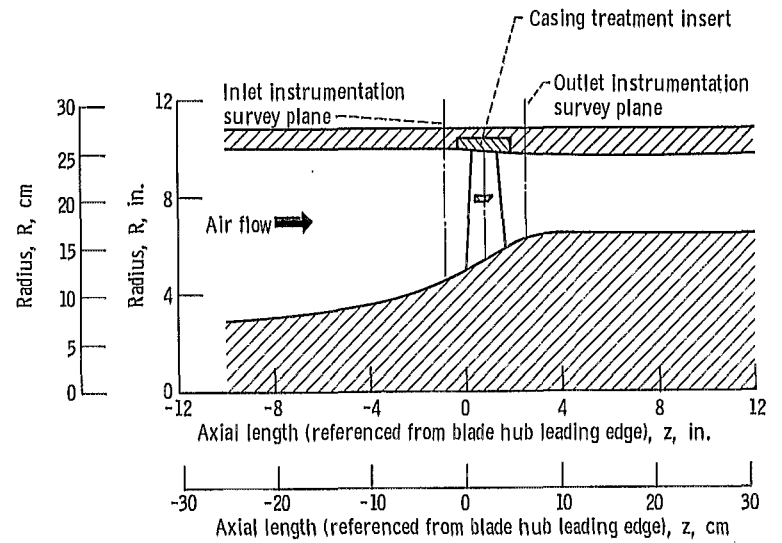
Meridional view of axial-flow rotor showing location of casing Insert.
